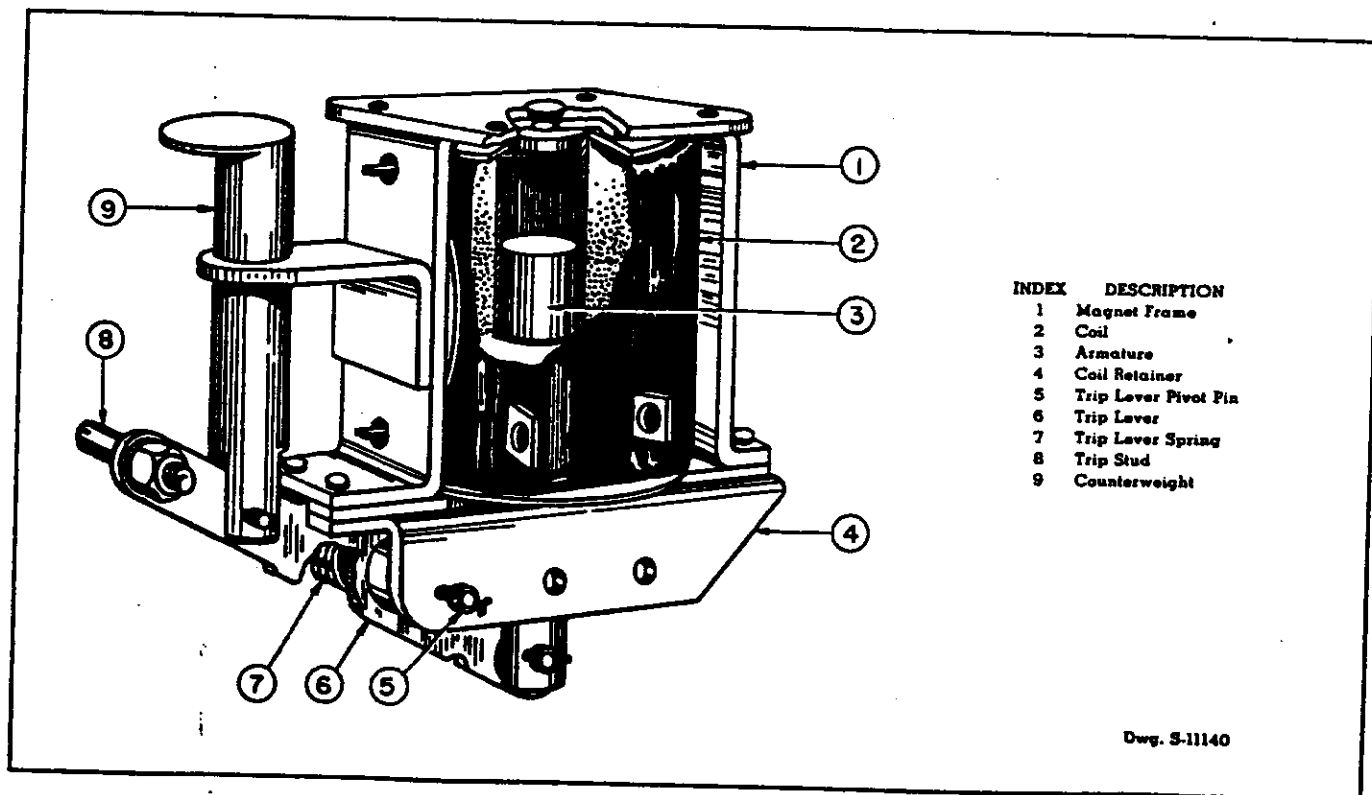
SHUNT TRIP FOR TYPE KB CIRCUIT BREAKER
